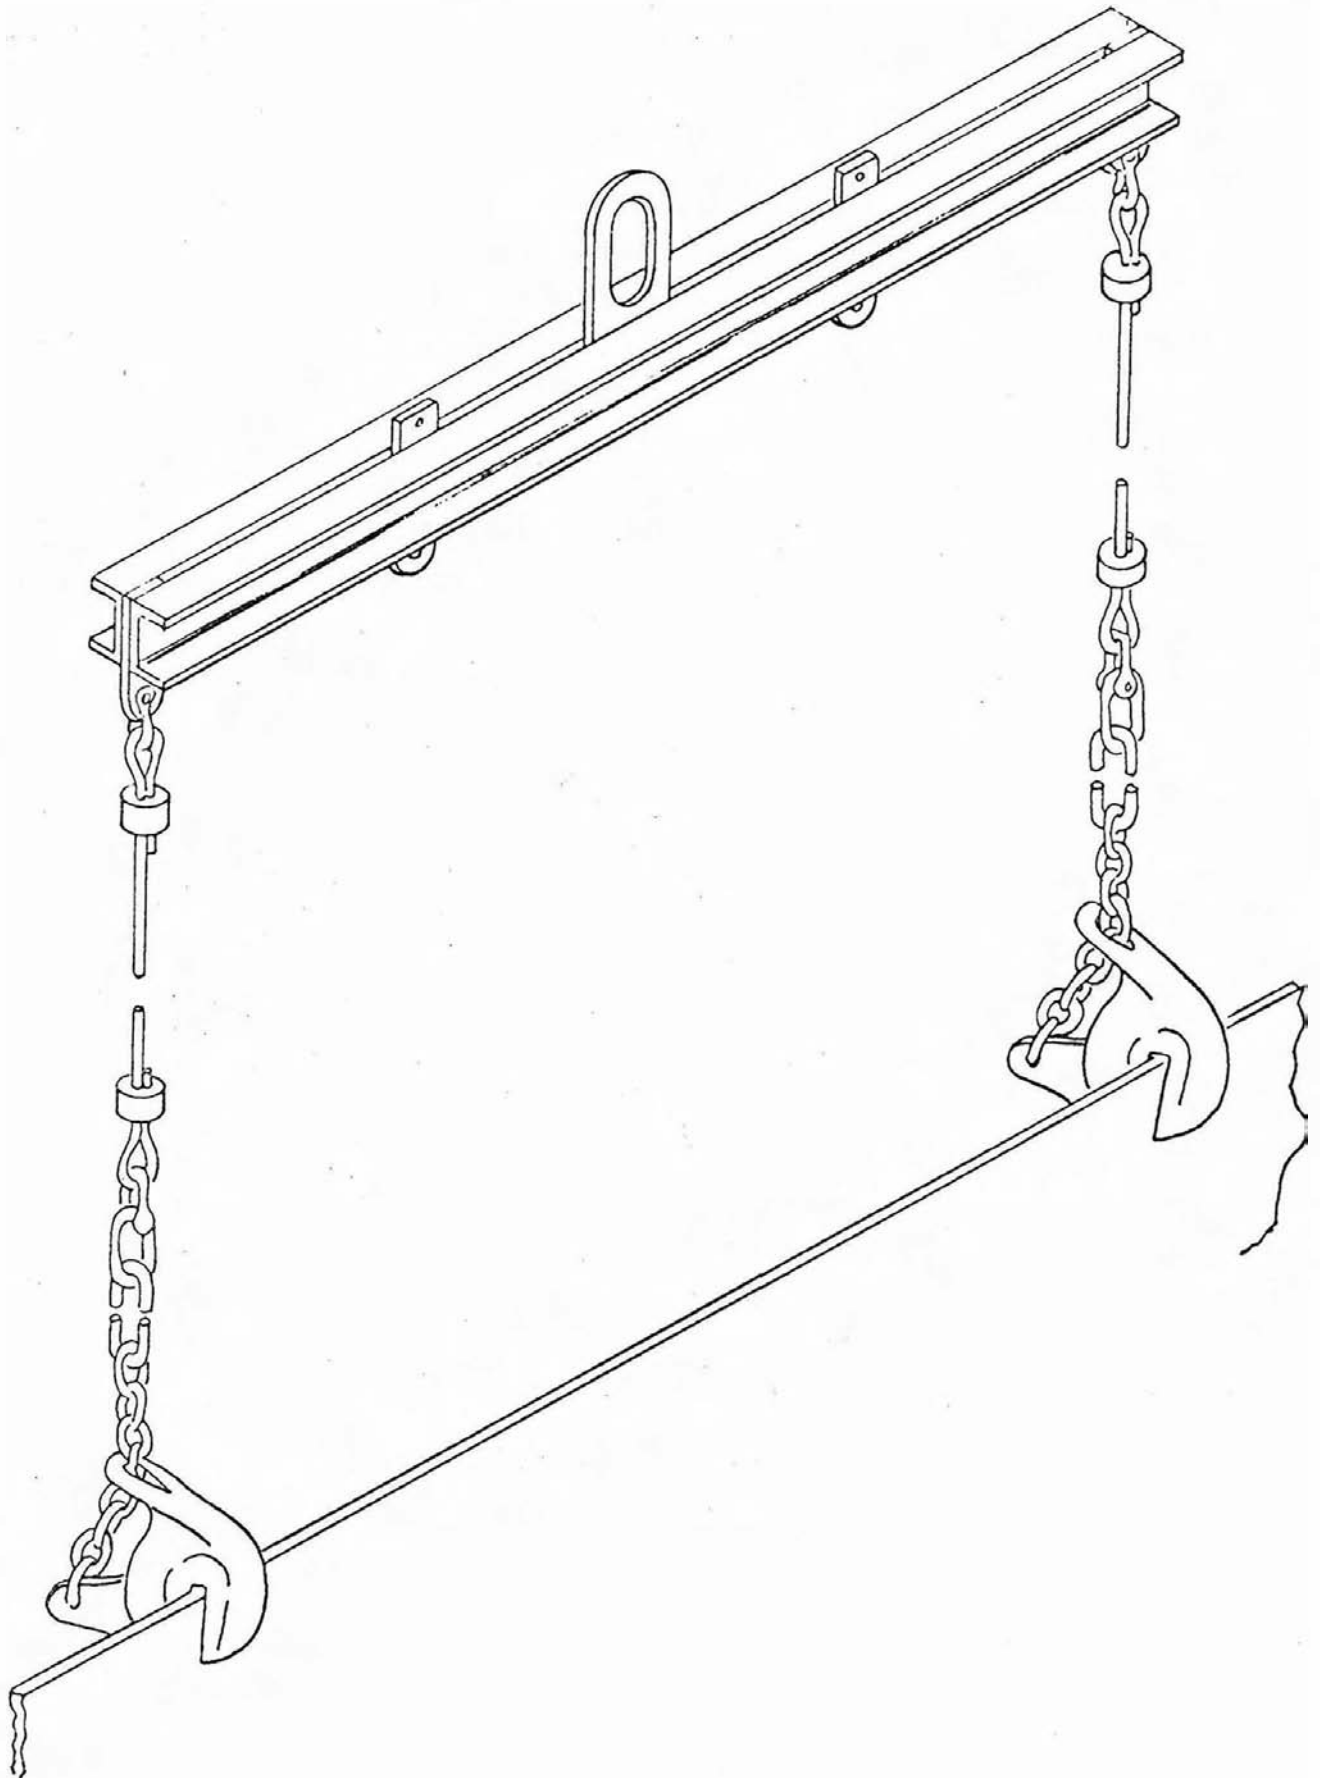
Skin Panel Assemblies and Thrust Ring Web Assemblies Hoisting Tool
